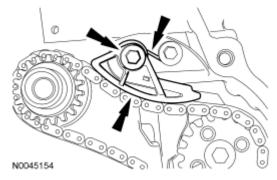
Locating Oil Pump Chain Tensioner And Bolt Courtesy of FORD MOTOR CO.
